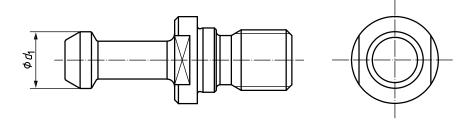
Retention knob — Form JF — Without cooling lubricant supply
